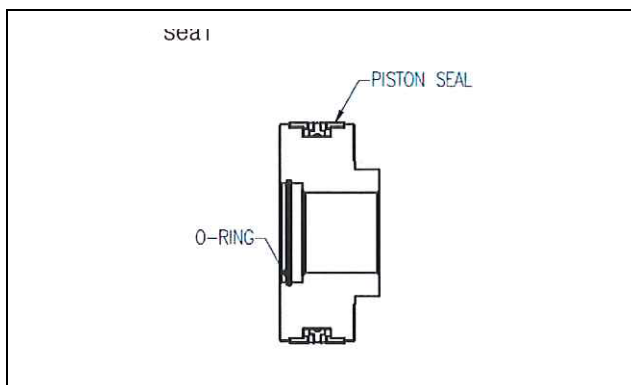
Piston Seal Removal (Upright Level Cylinder)
